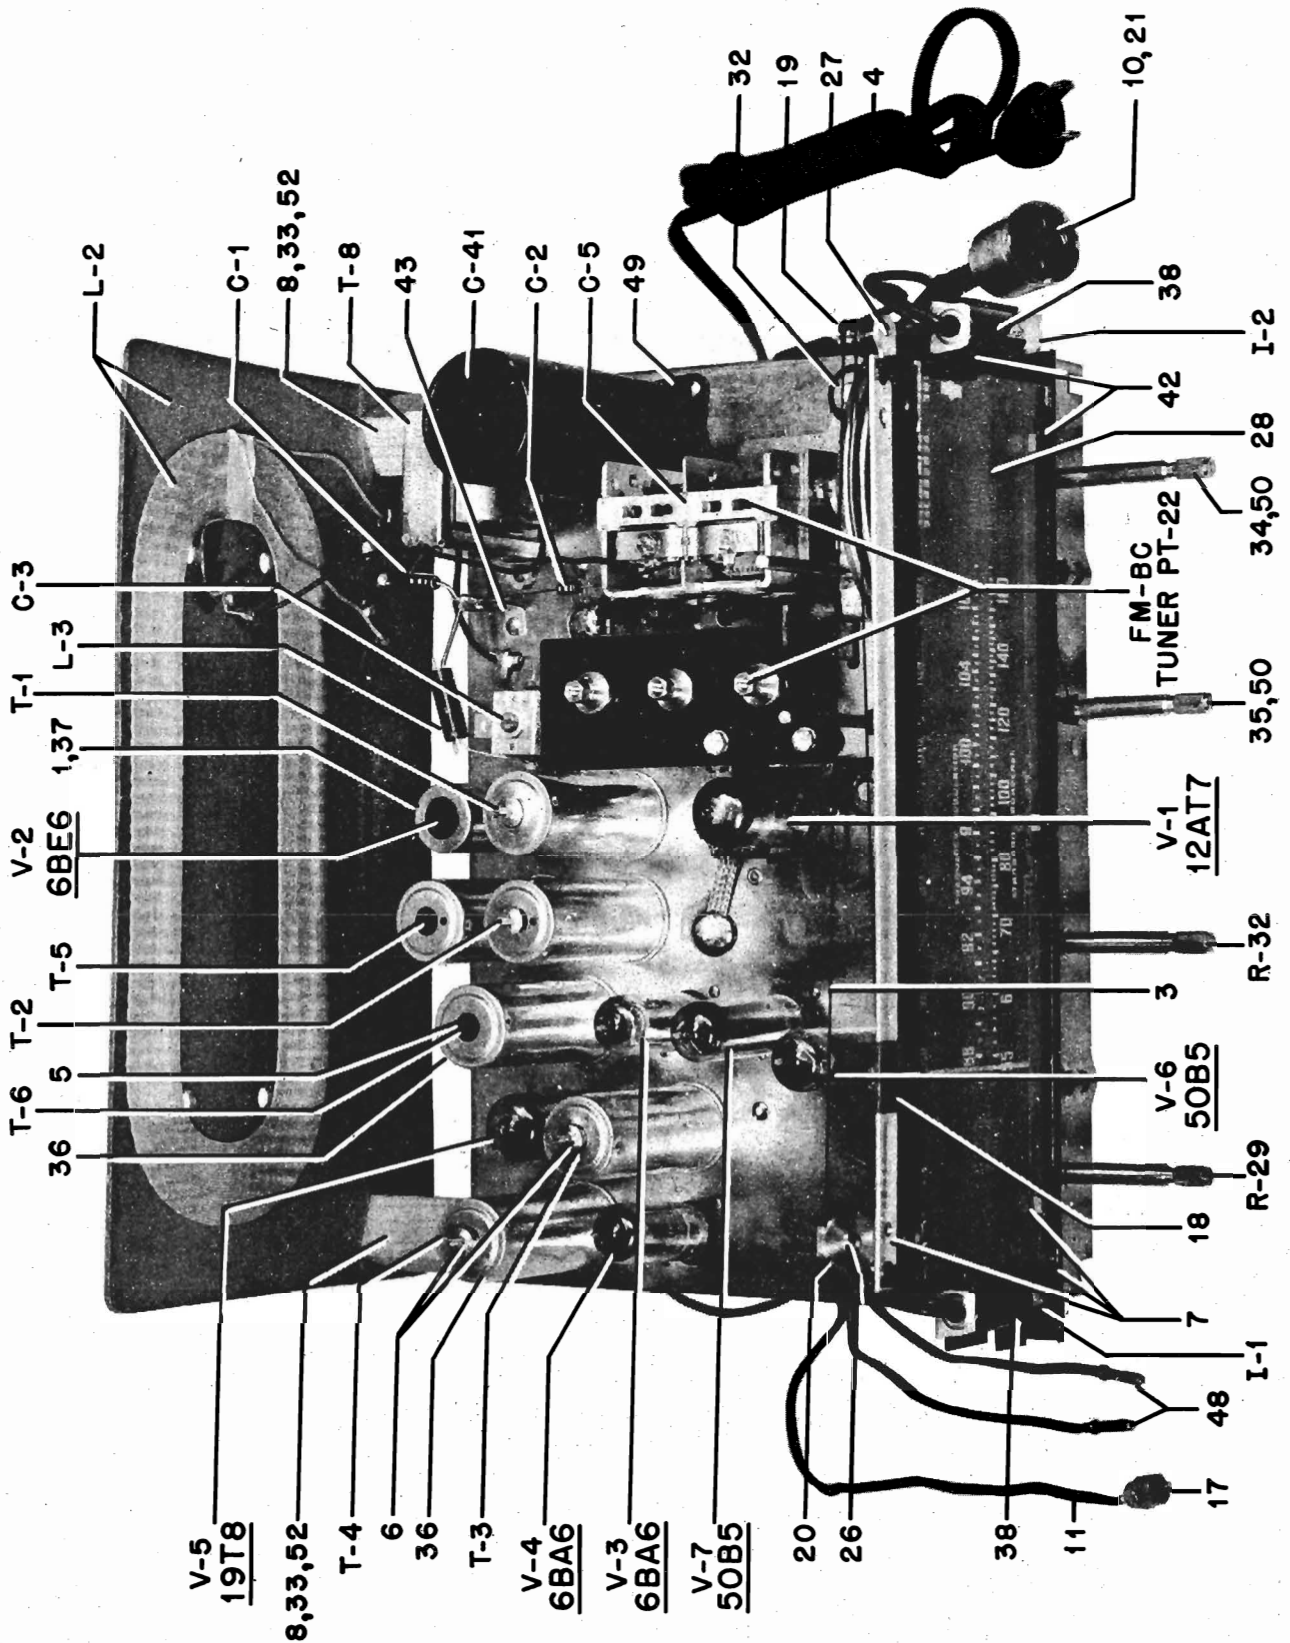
CHASSIS HS-133 PARTS LOCATIONS - TOP VIEW
